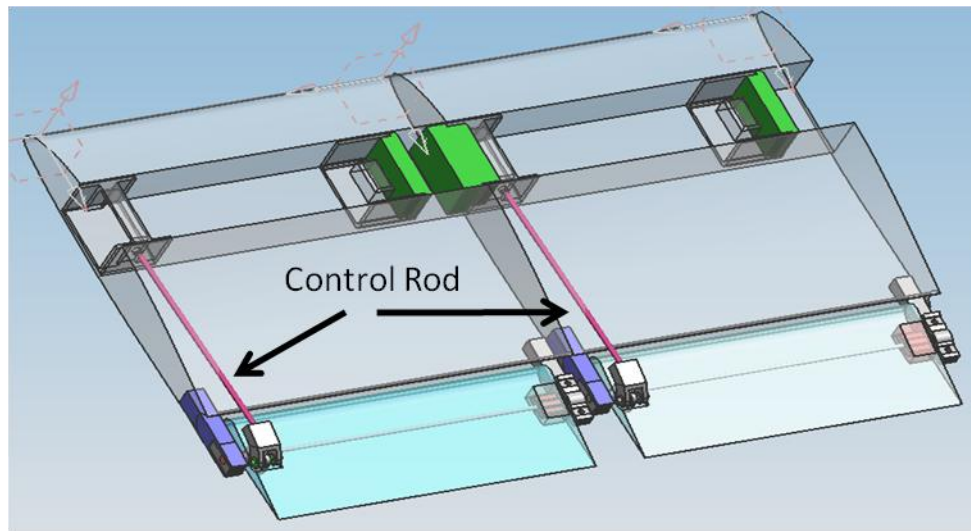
Schematic of the Dual Flap Section of Rotor Blade
